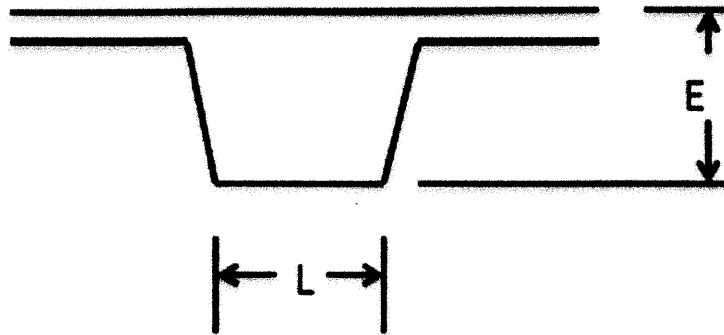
Groove design dimensions where L refers to the seal groove length and E refers to the groove depth.
